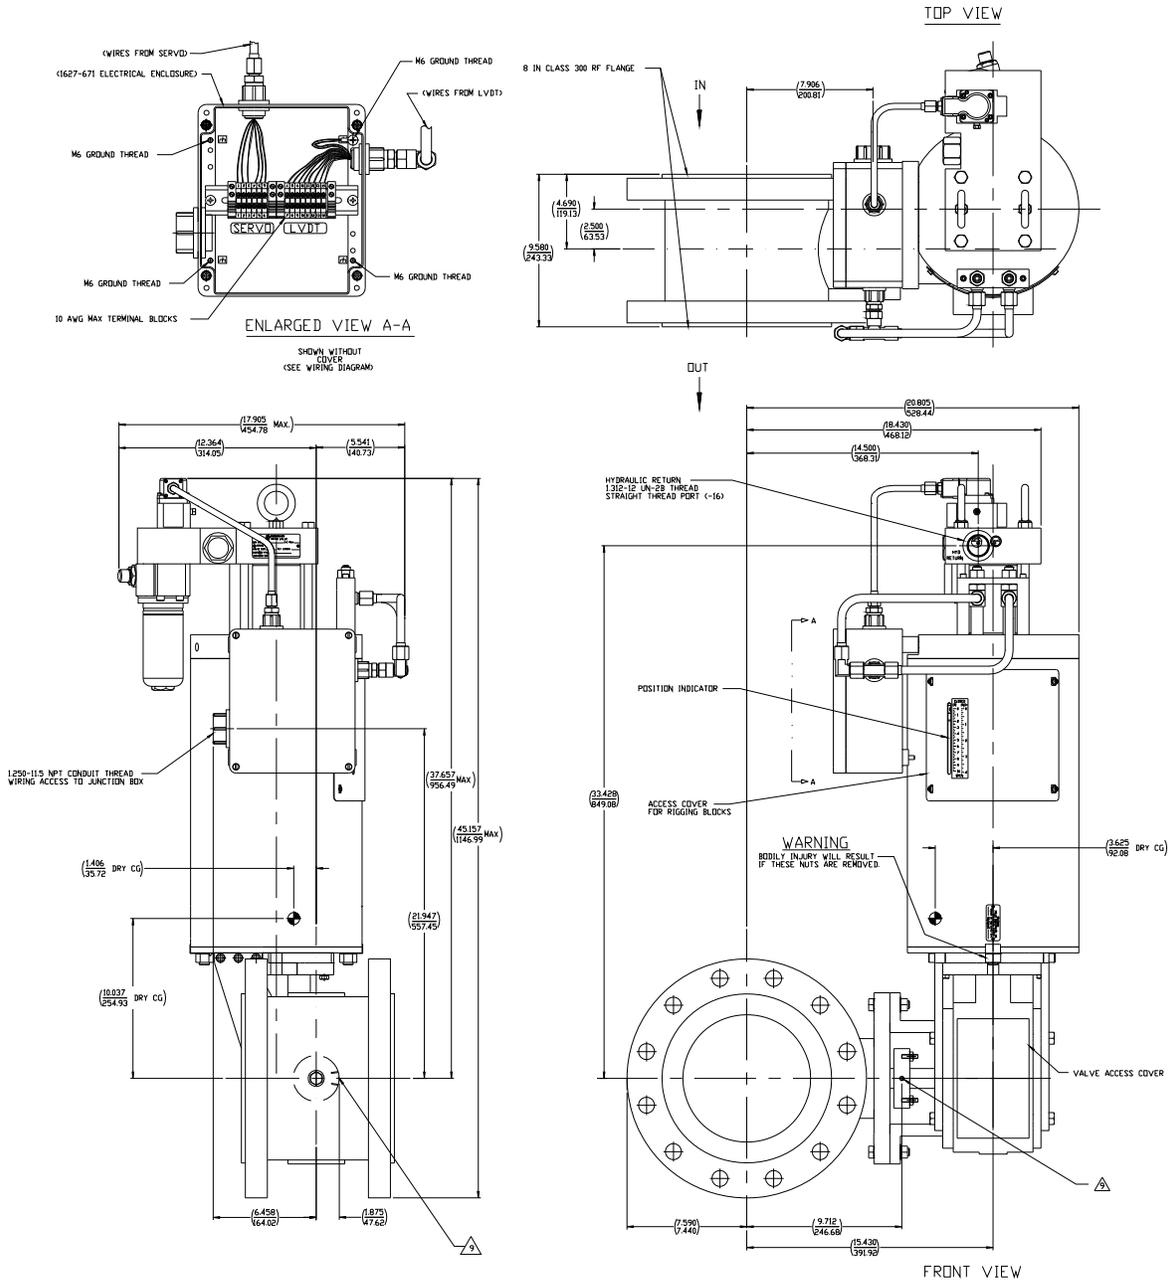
Gas Stop/Ratio Valve Outline Drawing (8-inch, with 2 LVDTs)
